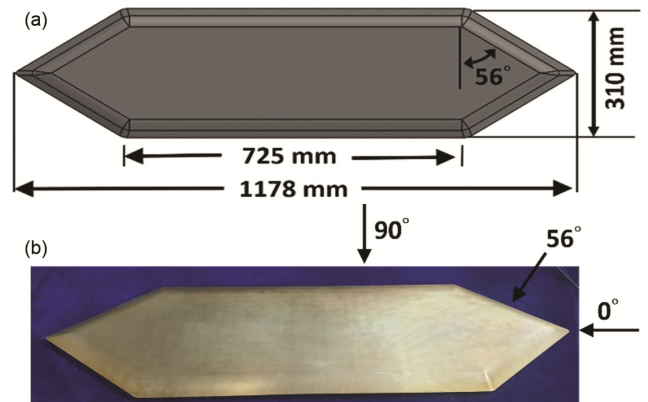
Faceted wedge-shaped body (a) 3D model with dimensions $(39.27\lambda \times 10.33\lambda)$ (b) Actual model
